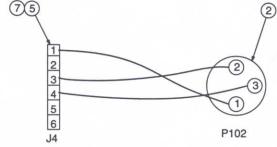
BP-350 Final Assembly 9010-7487-000
